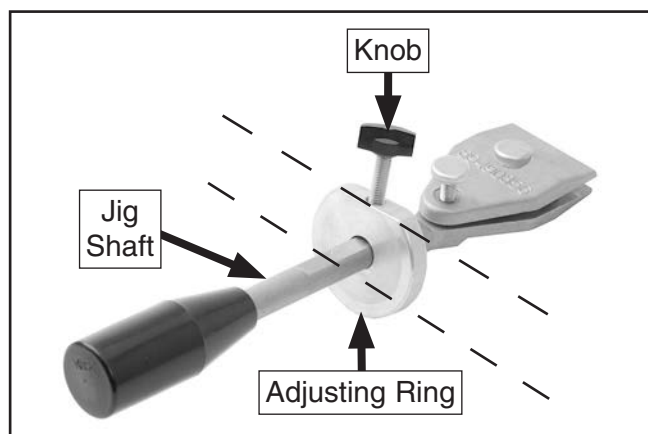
Adjusting ring secured correctly on jig shaft (T32797 shown).
